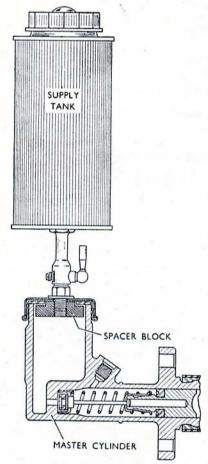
A supply tank as shown will ensure an adequate flow of fluid during bleeding. The tank can be constructed from a container of not less than 1 pint capacity, a suitable drain tap, a spare master cylinder filler cap and a spacer 34 in. thick. The latter will ensure correct fluid level when the tap is turned off and the tank removed
